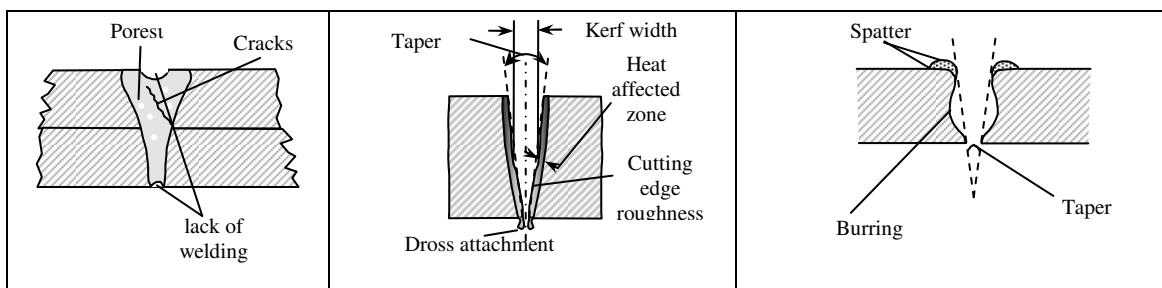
possible defects in laser welding, laser cutting and laser drilling processes.
